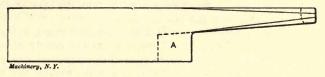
Bad Practice in Lengthening a Boring Tool Stem
